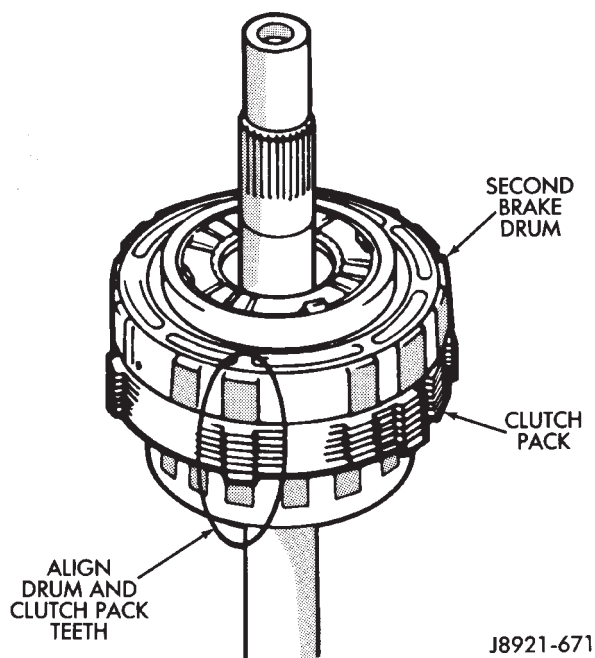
Aligning Second Brake Drum And Clutch Pack Teeth
